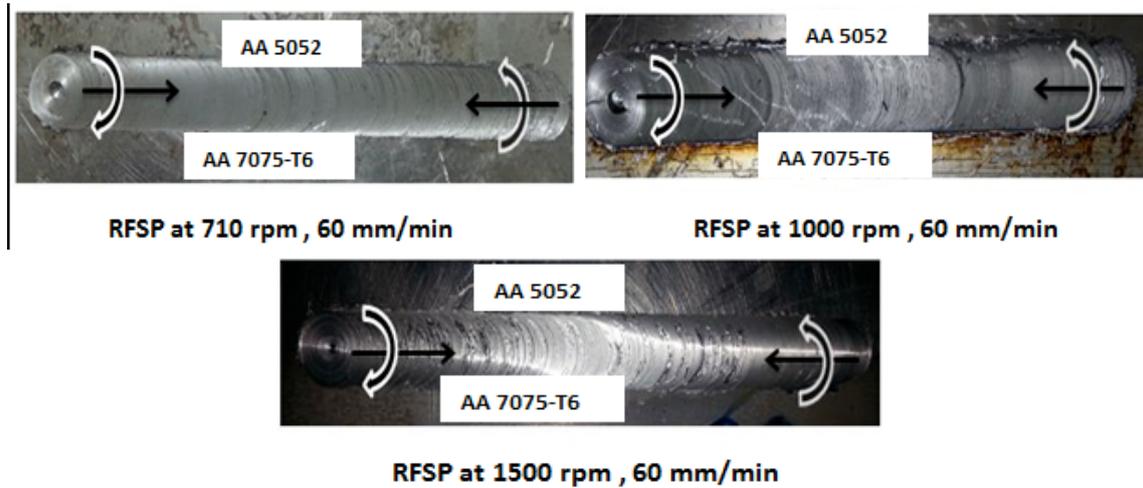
Welding line Surfaces for All RFSP Specimens
